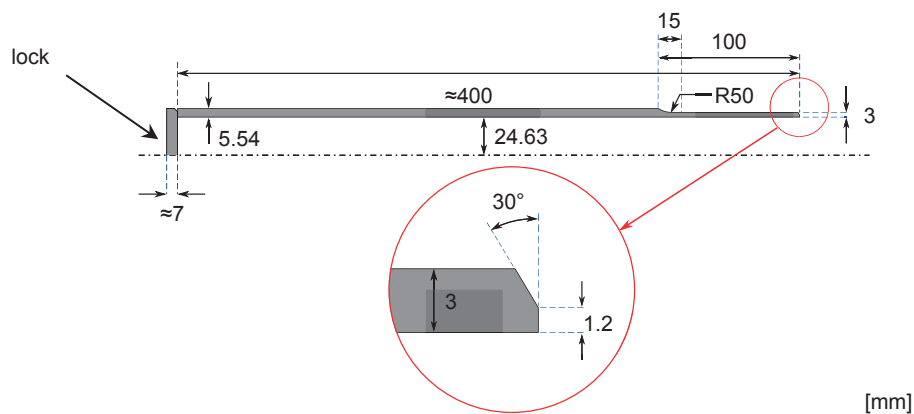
Schematic of the geometry of the piping components prior to welding.
